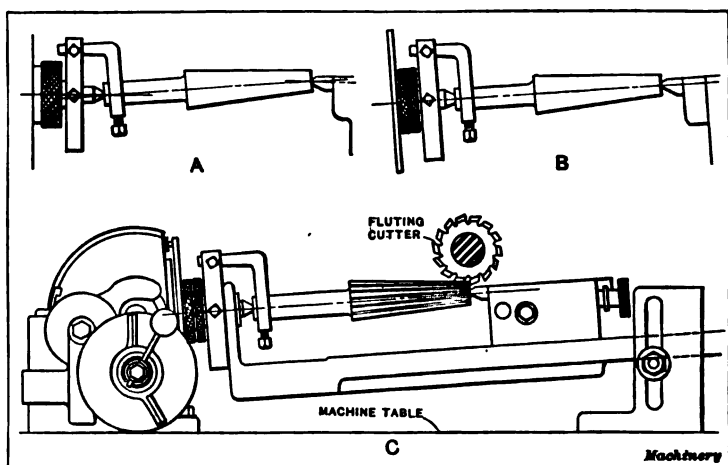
(A) Incorrect Method of Holding Taper Blank for Fluting.
